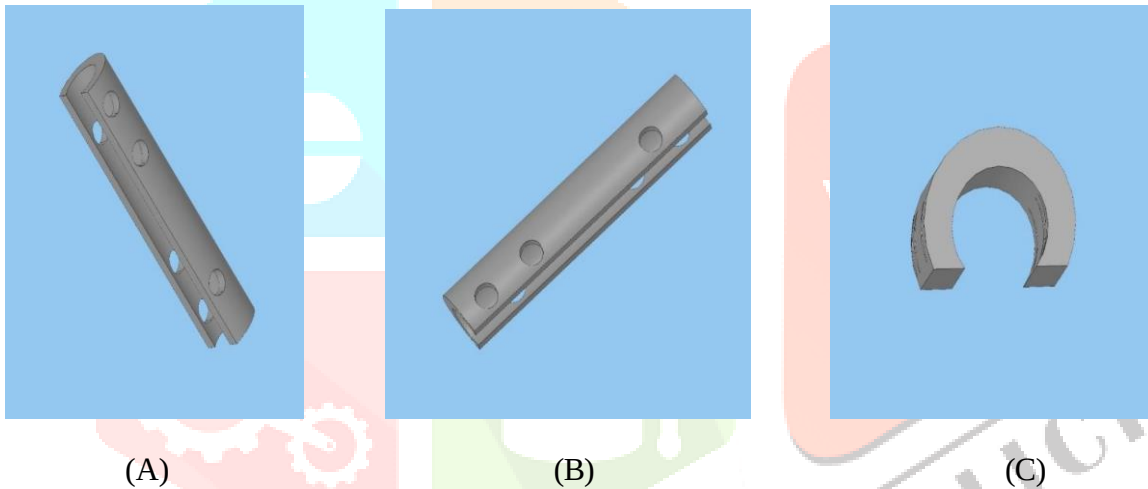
3D model of distal radius bone plate (A) Right side view (B) Left side view (C) Front view
